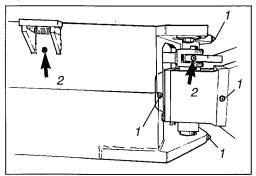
Steering joint, right side 1 Lubricating nipples, steering joint 2 Lubricating nipples, steering cylinders
